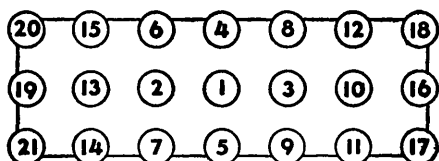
Six cylinder head tight ning. 1948-52 L-Head
